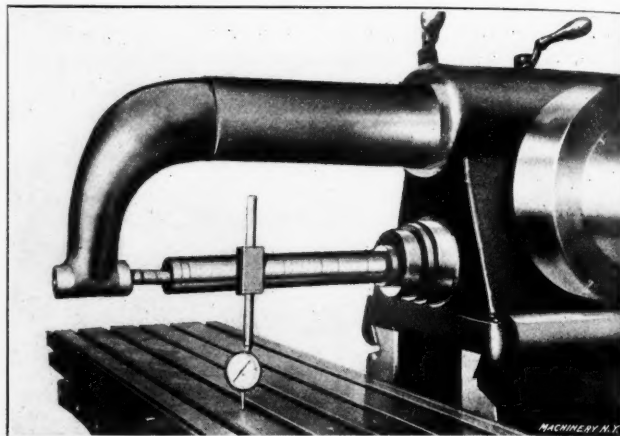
Testing Longitudinal Alignment of Milling Machine Table
